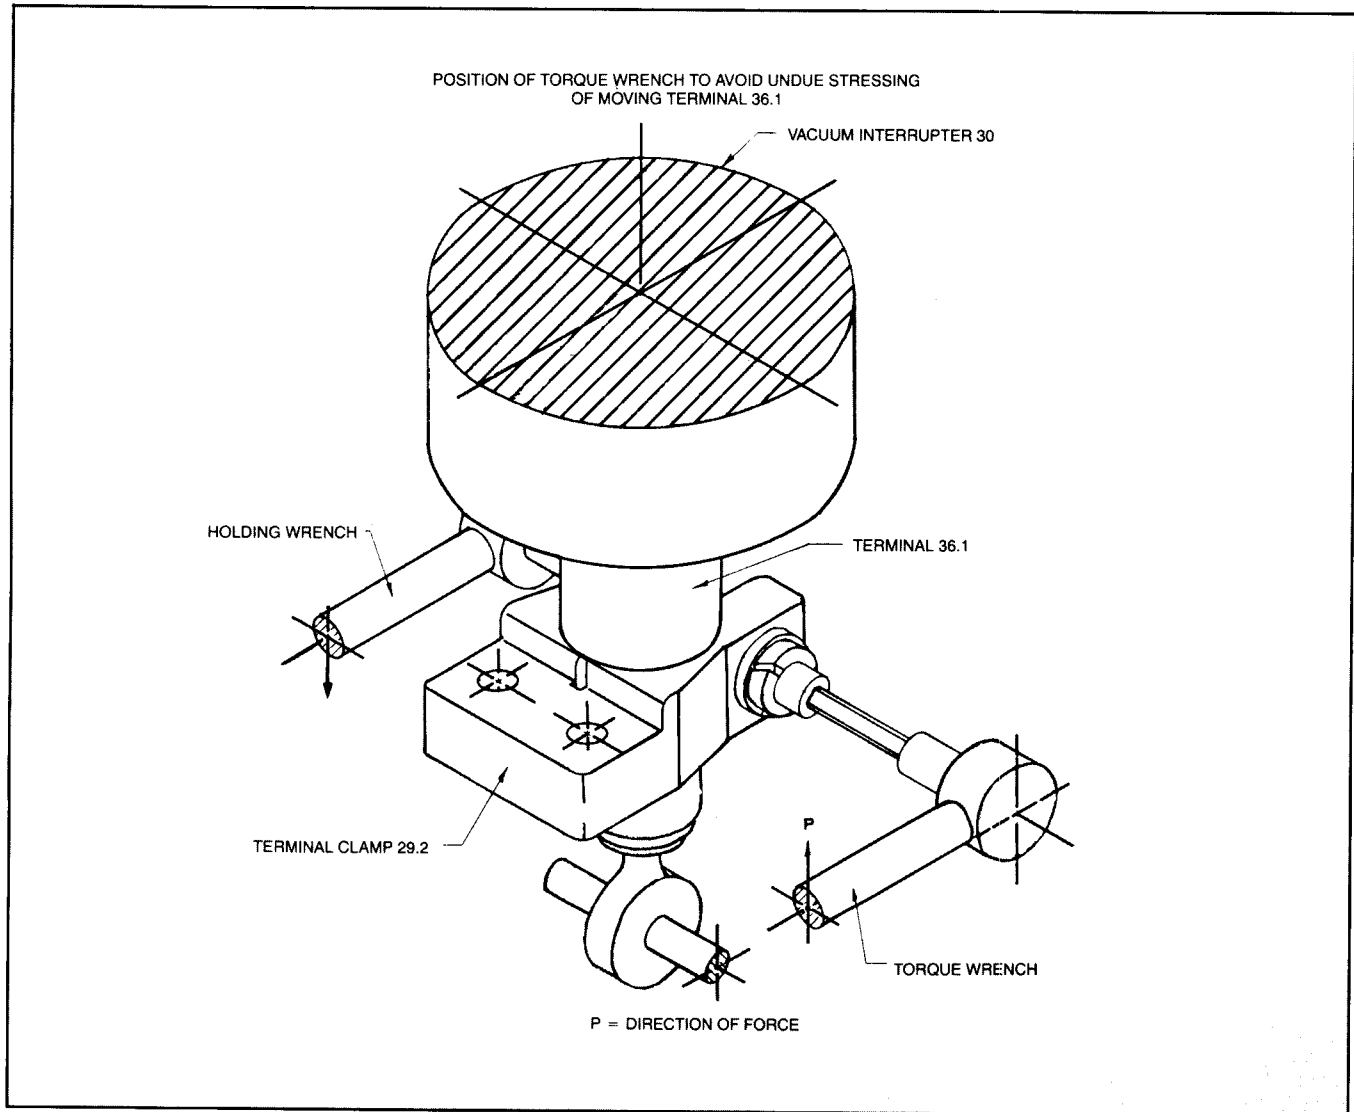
Illustration Showing Required Technique For Fastening Terminal Clamp Hardware
